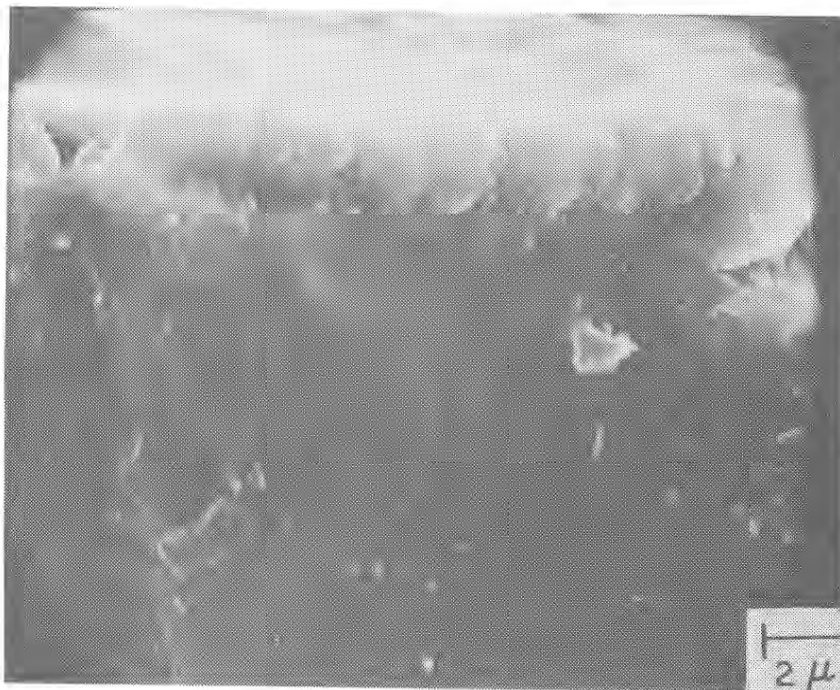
Fracture surface through an EDM cut edge in sample 4a showing recast layer size in a large SiC grain.
